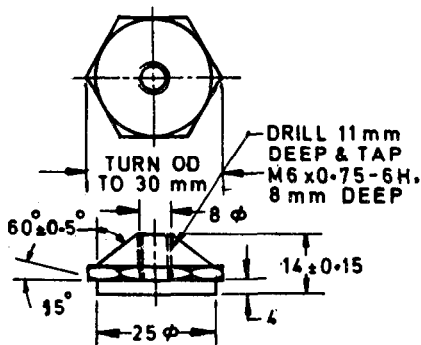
SAND EQUIVALENT TEST APPARATUS—Contd
